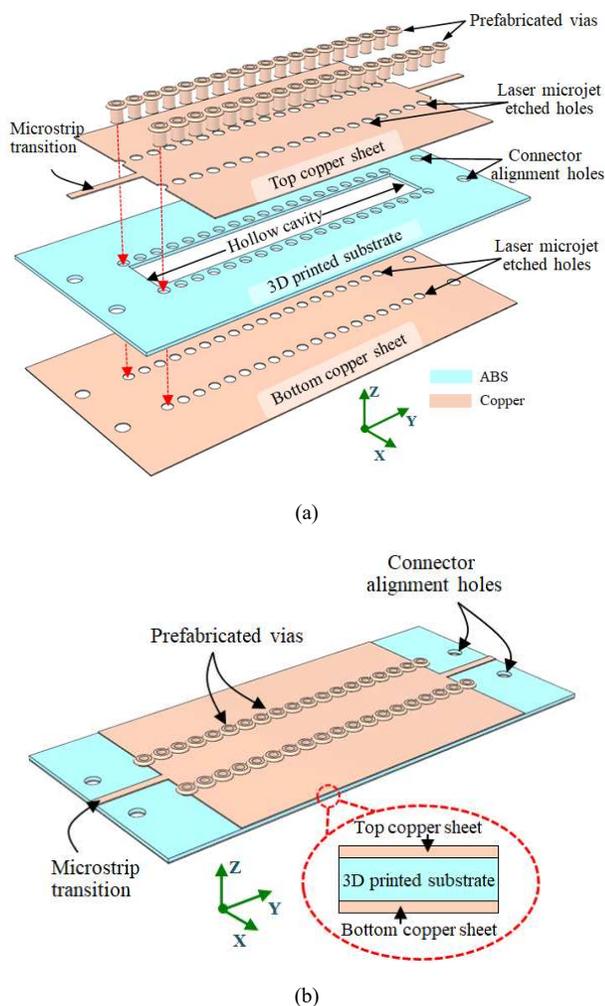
3D geometry of HSIW : (a) before assembly and (b) after assembly.
